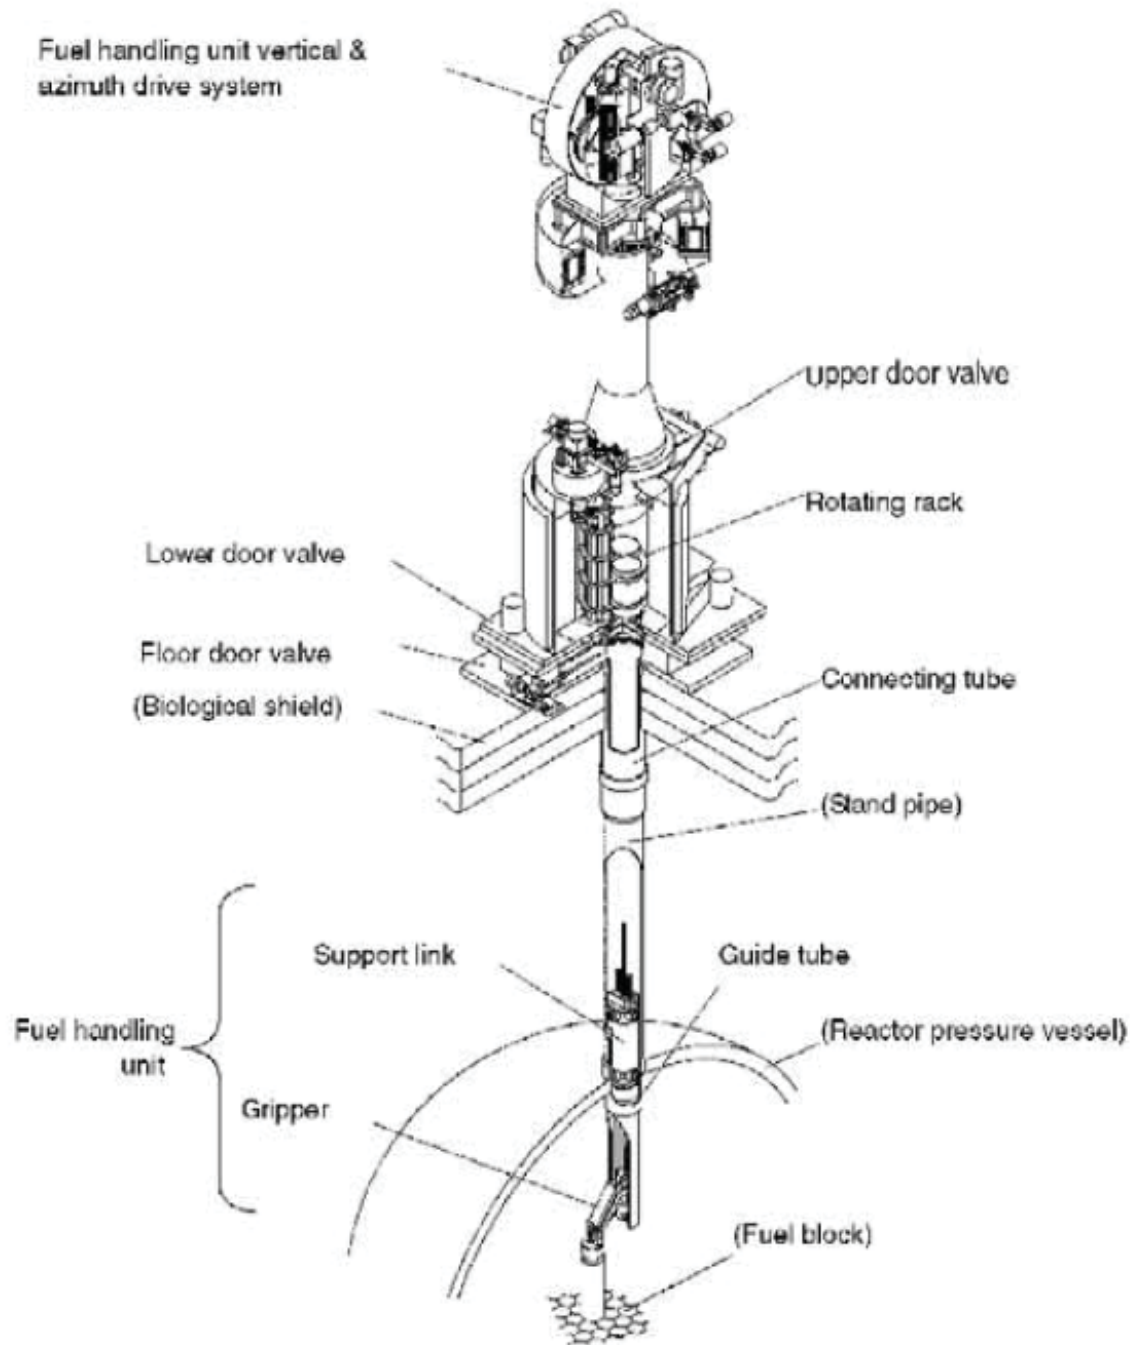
HTTR Fuel Handling Machine (Ref. 14, p. 384).
